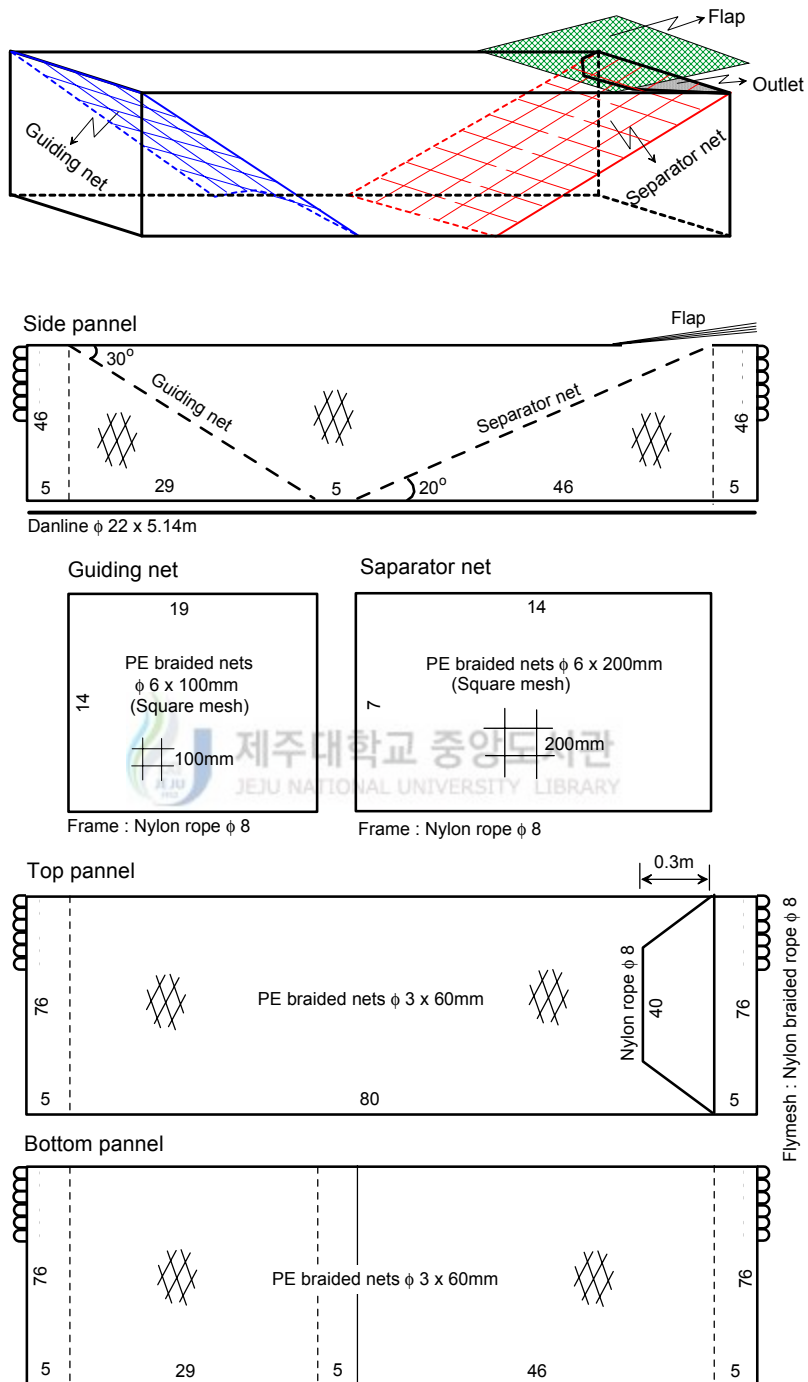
Schematic shape and technical drawing of the GSF type jellyfish separator system.
